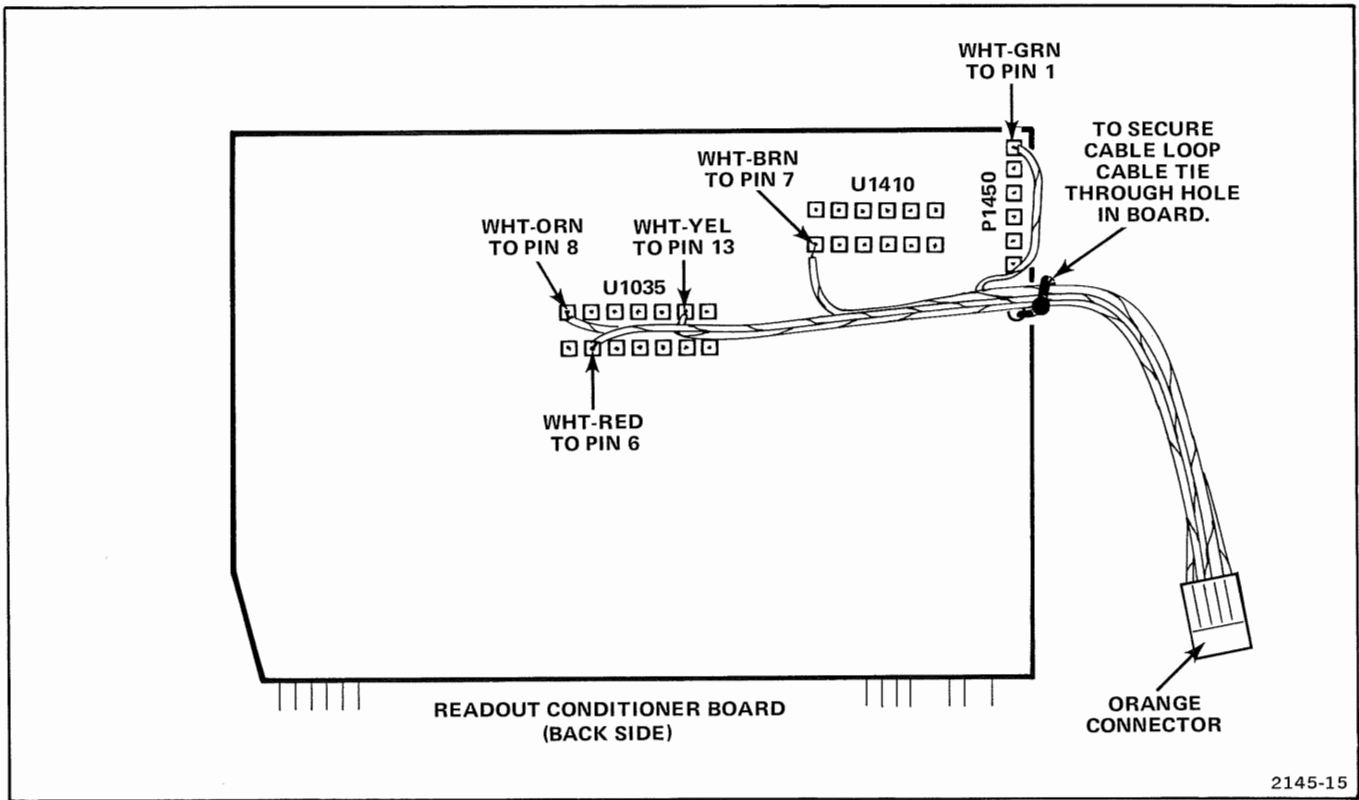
Installing 5-wire cable to 414 Option 21 (MOD FA) Readout Conditioner Board.
